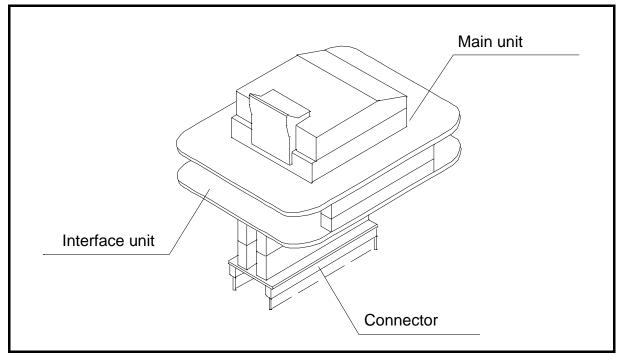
External view of the programming adapter (QFP, SOP, LCC type IC socket) and constituent parts
